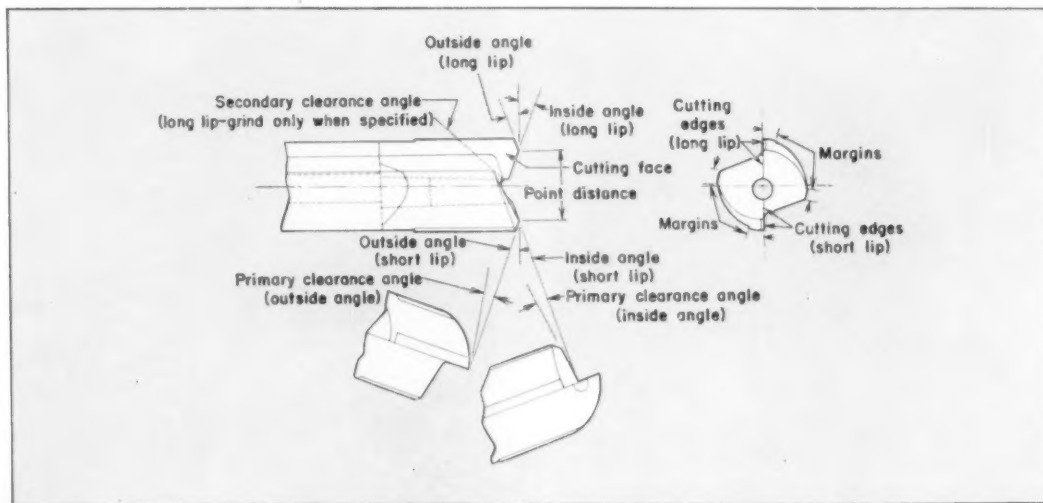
Grinding specifications for two-flute pin-cutting gun drills.
